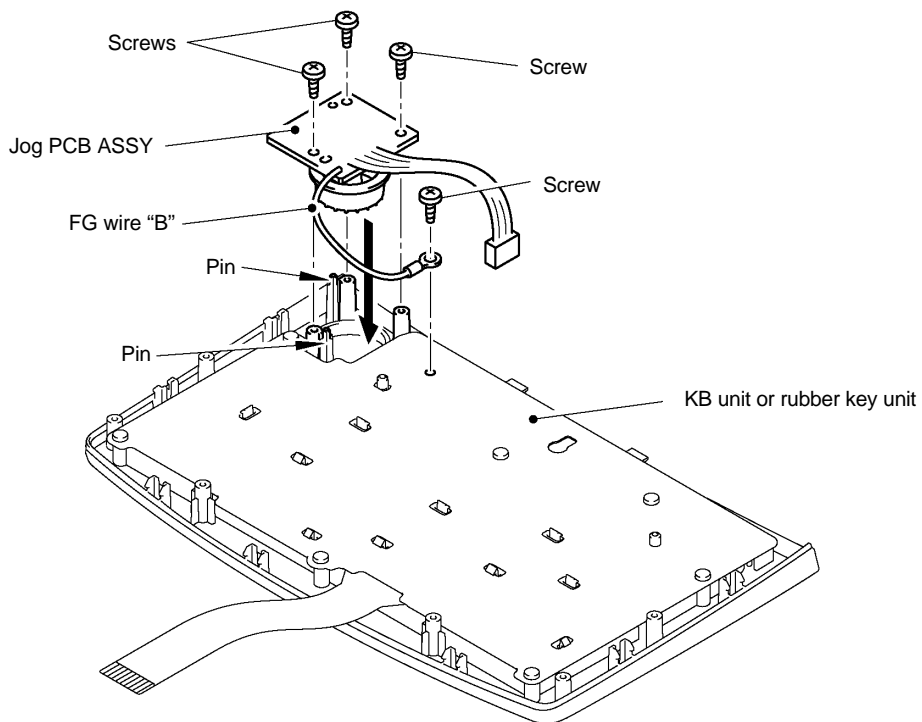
Reassembling the KB Unit/Rubber Key Unit (6)
